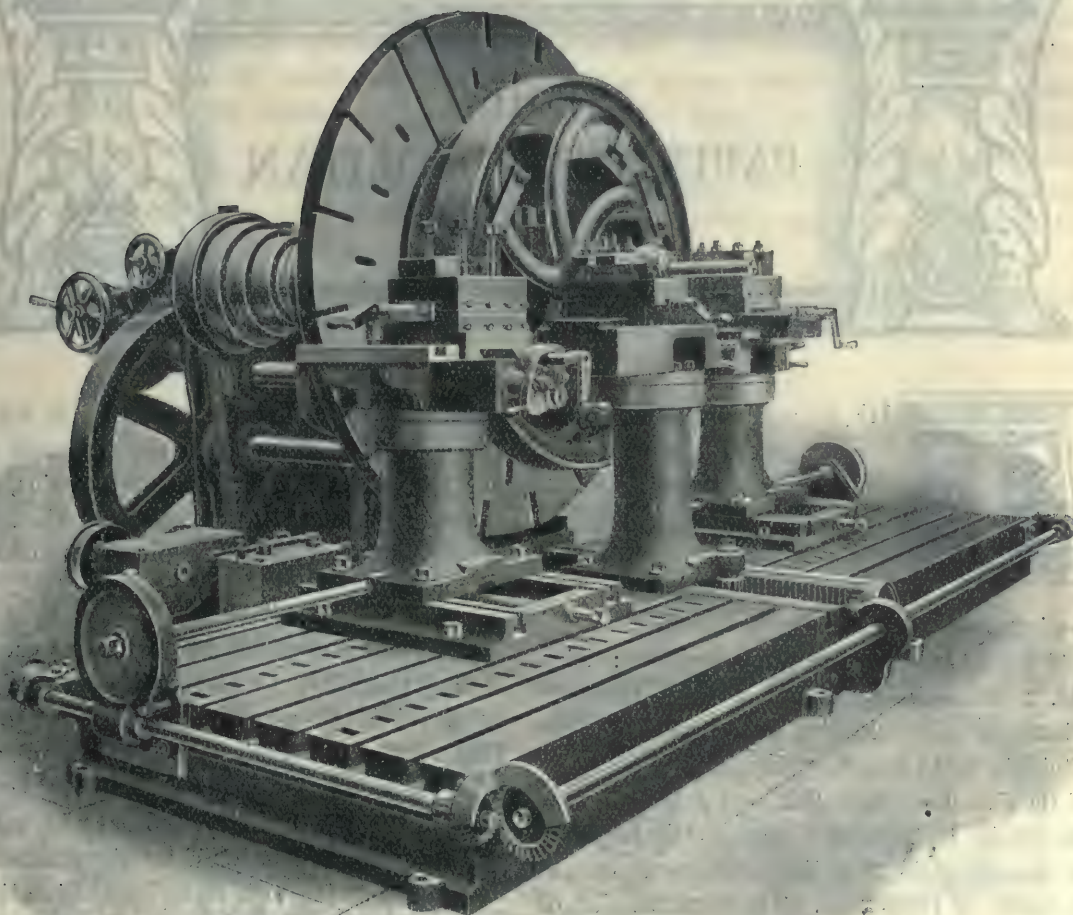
FLY-WHEEL BORING, TURNING AND BOSSING MACHINE.
